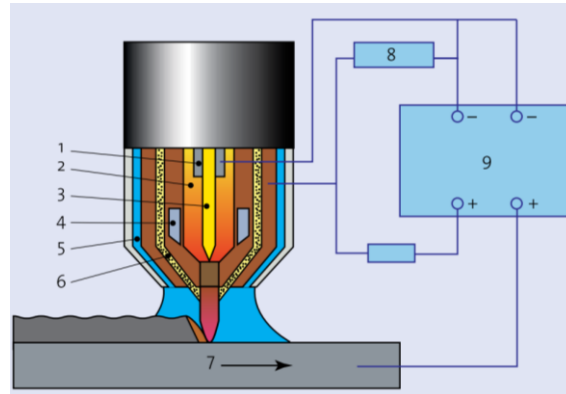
Plasma Transferred Arc Welding [16]
